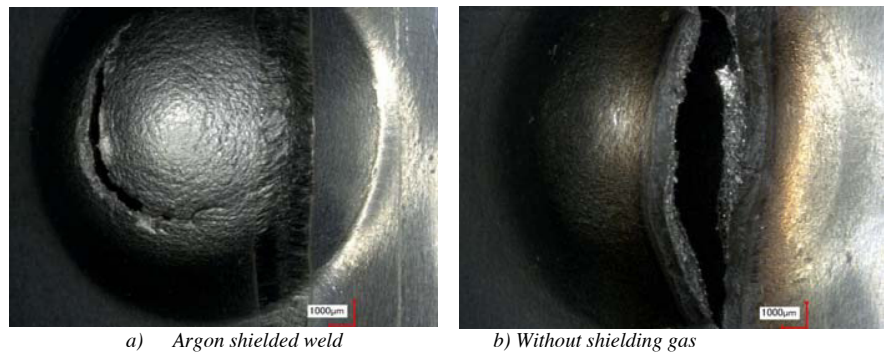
The Erichsen cupping test samples for laser weld samples E=90 J/mm, welded with and without Argon shielding.
